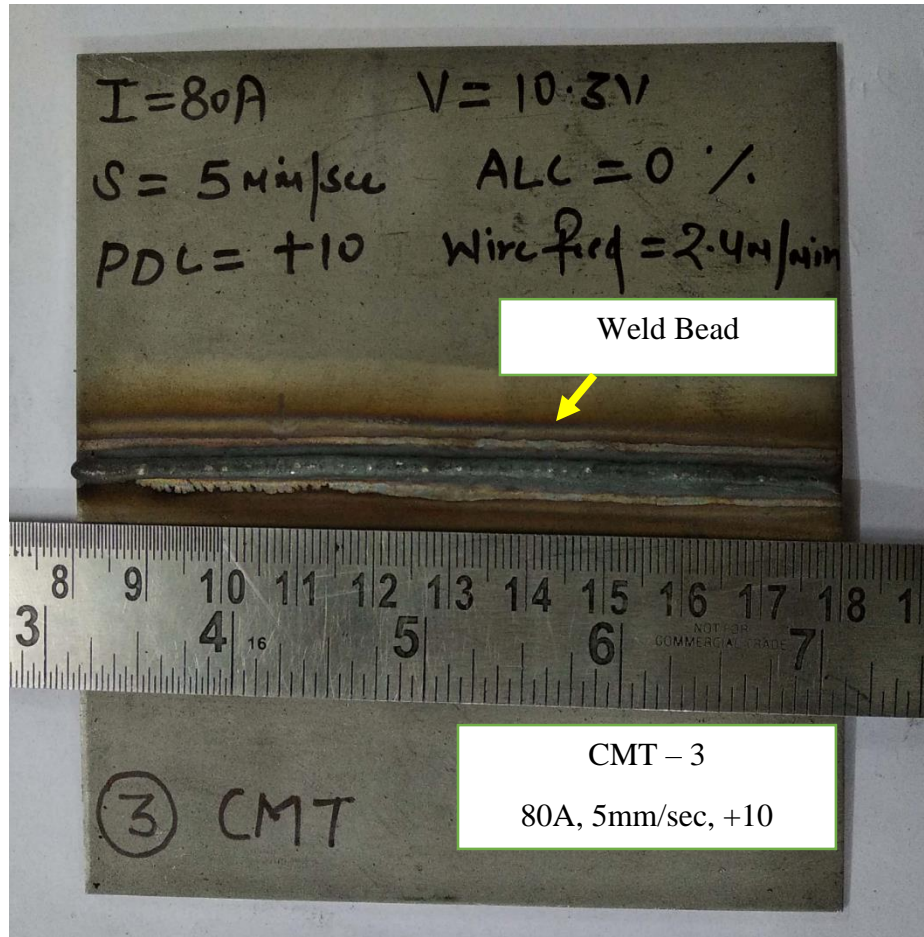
Image of CMT welded SS202 Sample 3 of thickness 1.58 mm
